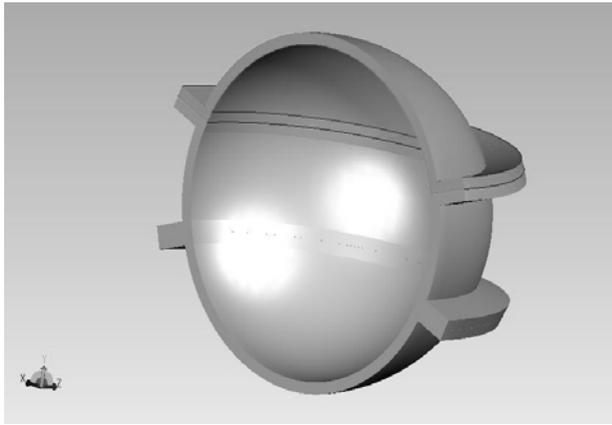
Cut-Away sectional view of a 3 piece monolithic shell.
